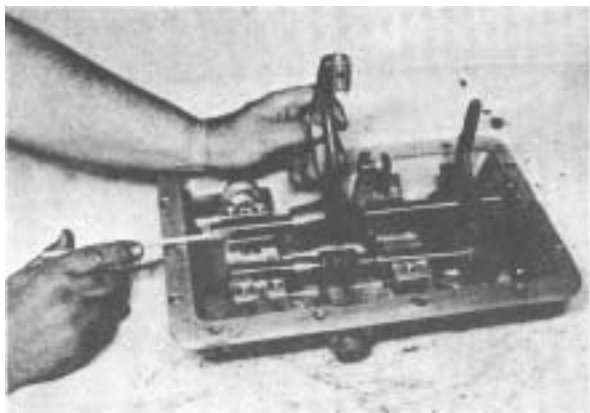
Install interlock cross pin in 2nd & 3rd shift rail. Position 2nd & 3rd shift rail and fork assembly in rail groove over mesh lock ball and spring. Make certain cross pin is in position in rail. (See Figure 13-A).
